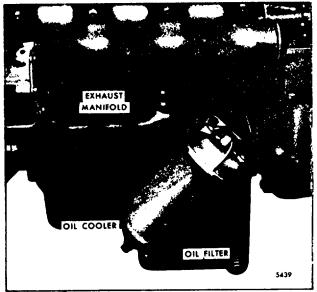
Typical Full-Flow Filter Mounting (6V Engine Shown)
